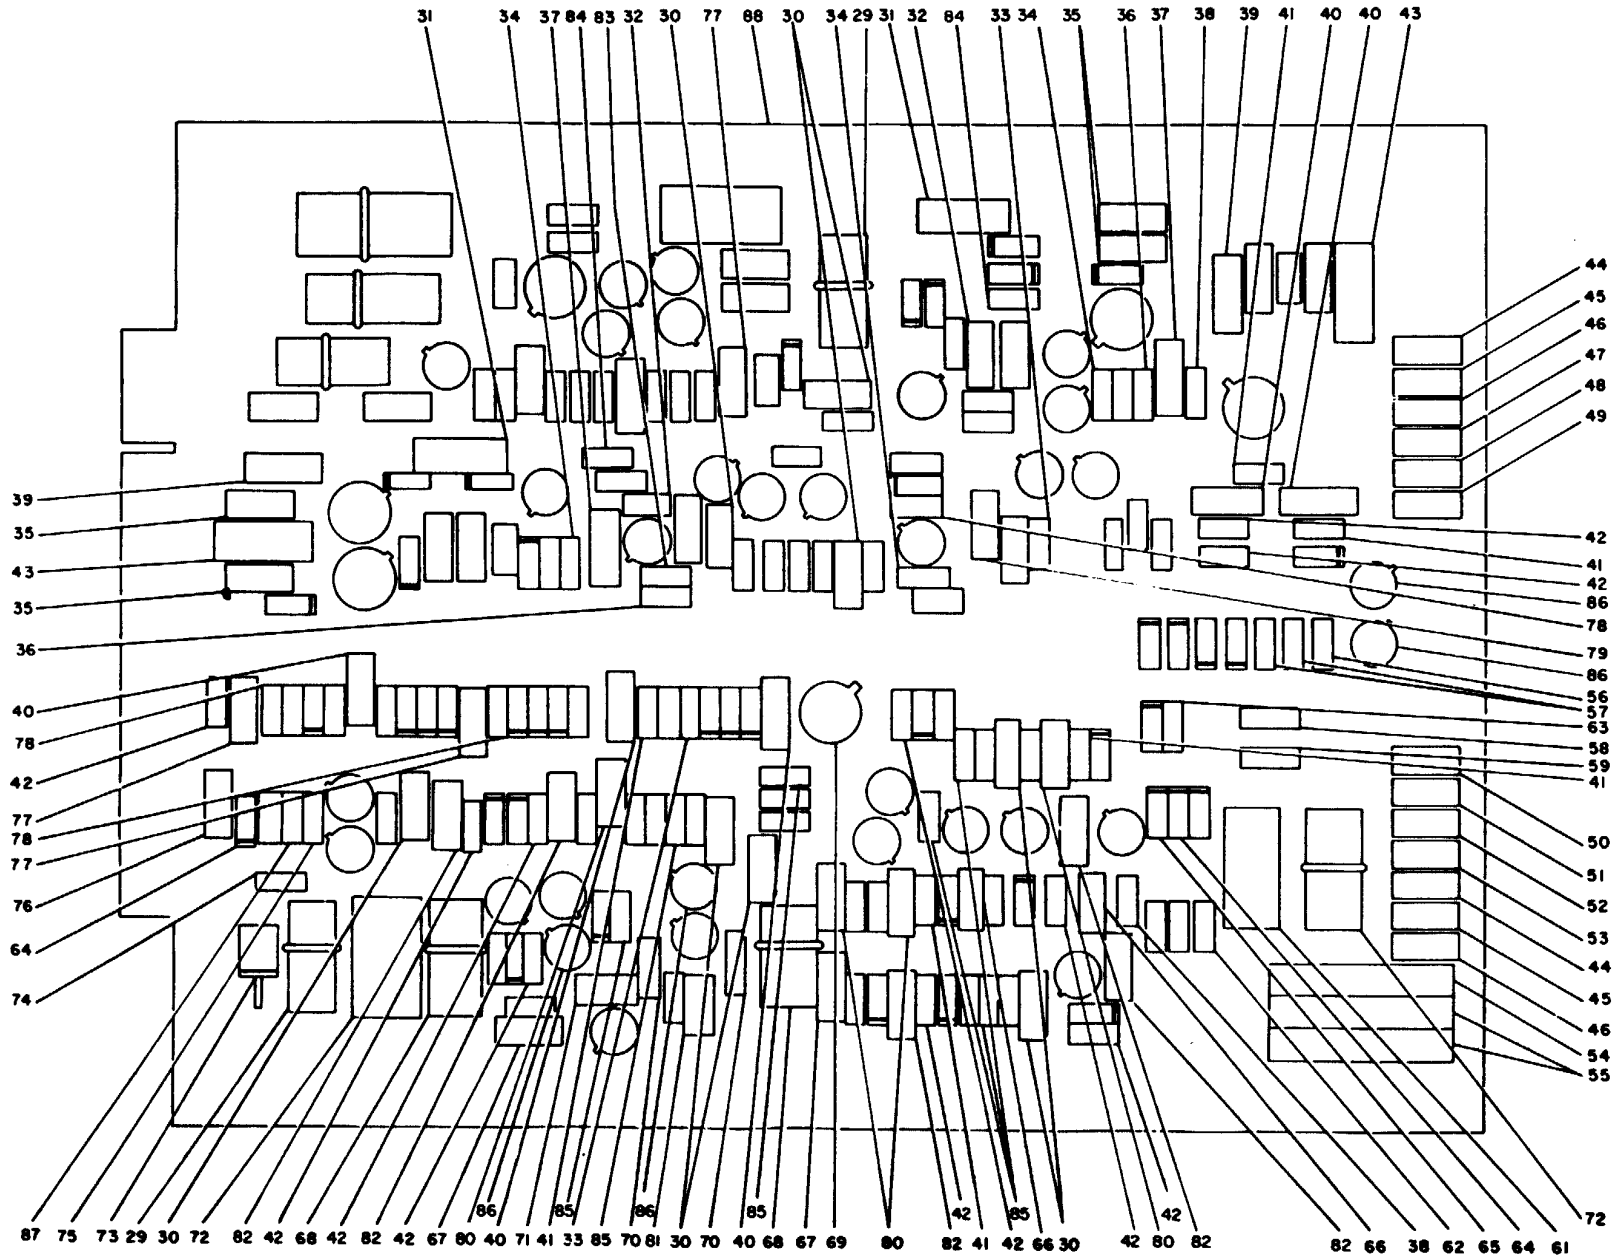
Circuit Card Assembly, Logic No. 2 (Sheet 2 of 2)
